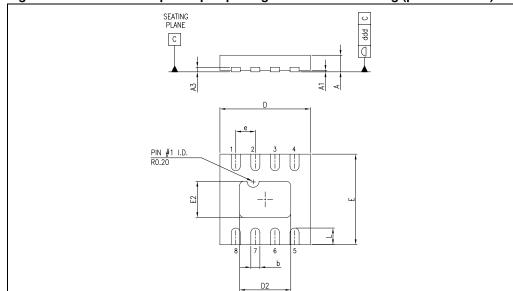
DFN8 3 x 3 exposed pad package mechanical drawing (pitch 0.65 mm)
